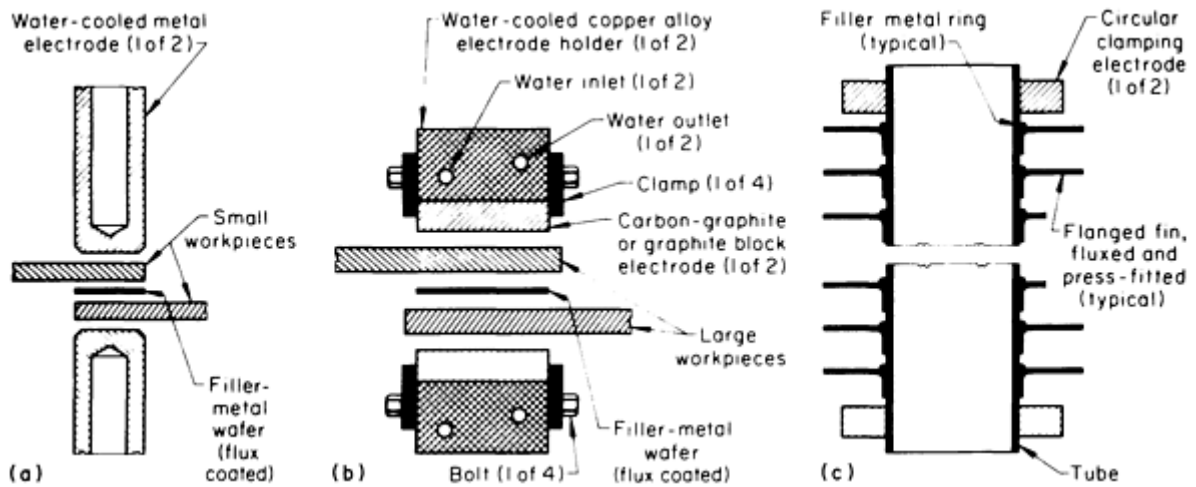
TYPICAL SETUPS FOR RESISTANCE BRAZING. (A) FOR SMALL PARTS OR SMALL FLAT PORTIONS OF LARGER COMPONENTS, USING OPPOSED WATER-COOLED METAL ELECTRODES OF THE CONVENTIONAL RESISTANCE WELDING TYPE. (B) FOR LARGE FLAT PARTS, TYPICALLY OF A HIGHLY CONDUCTIVE METAL (FOR EXAMPLE, COPPER), USING OPPOSED CARBON BLOCK ELECTRODES ATTACHED TO WATER-COOLED COPPER ALLOY ELECTRODE HOLDERS. (C) FOR JOINING FLANGED FINS TO A TUBE, USING CIRCULAR CLAMPING ELECTRODES
